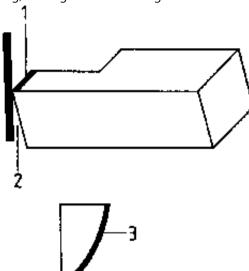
Right-hand end-cut turning tool with special grinding for cutting out
